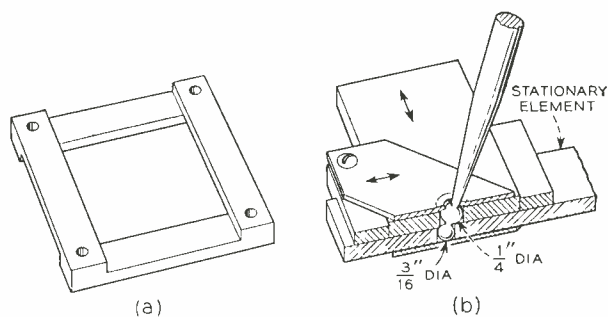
The milled frame (a) and a cutaway drawing showing the operation of the joy-stick (b).
